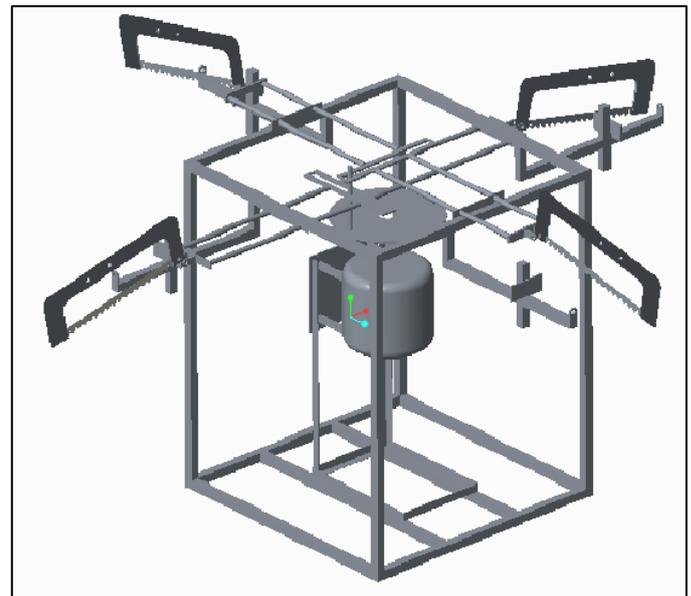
CAD model of Automatic Four Way Hacksaw Machine
